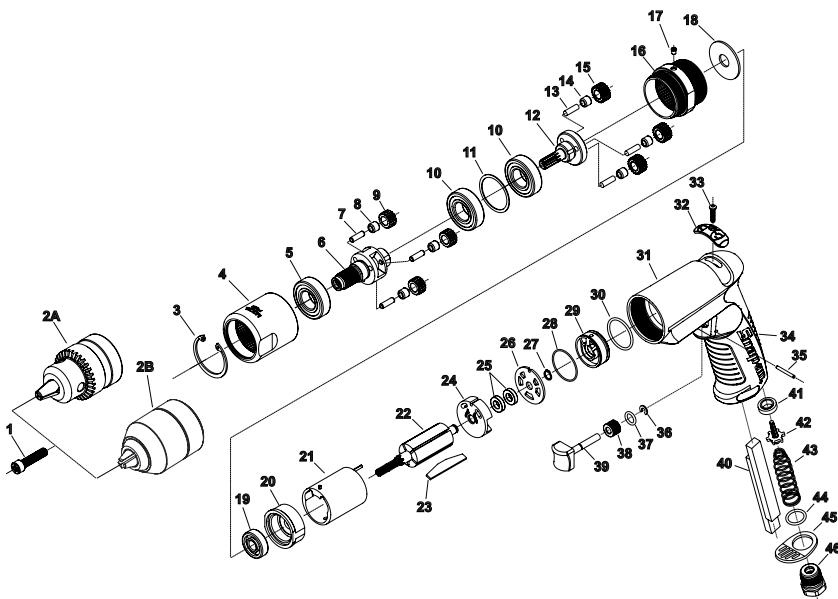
PDR5000A &amp; PDR5001 Reversible Air Drills
